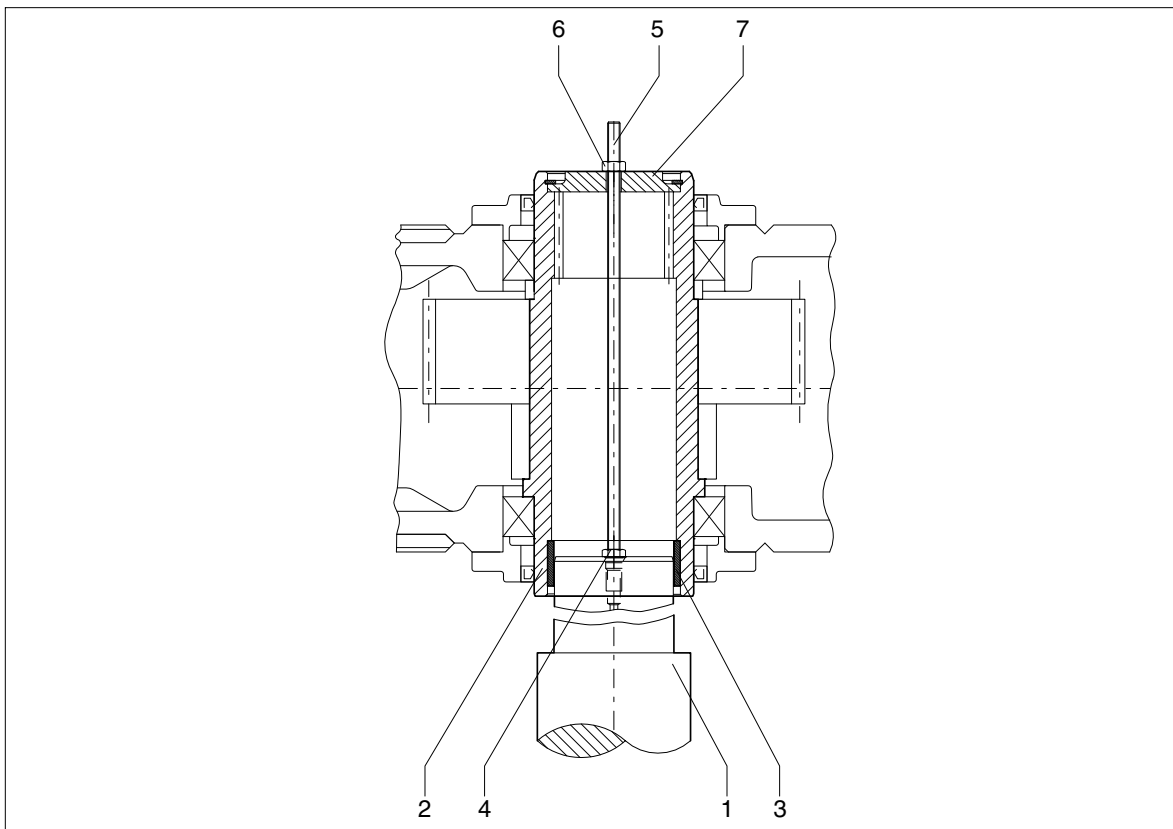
Hollow shaft with splines, fitting with integrated DU bush
